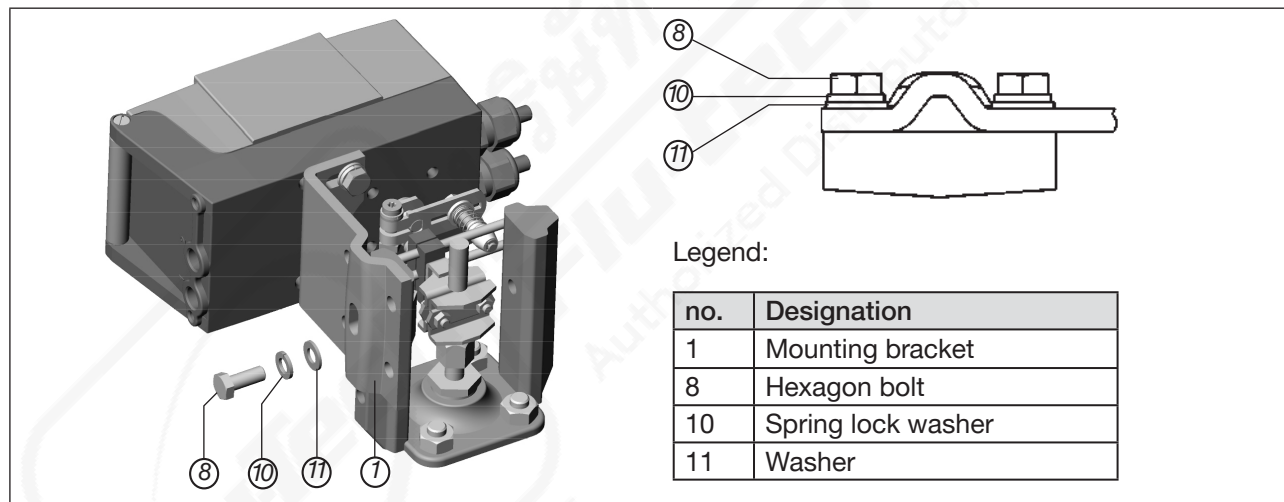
Attaching the positioner with the mounting bracket; for actuators with a cast frame
